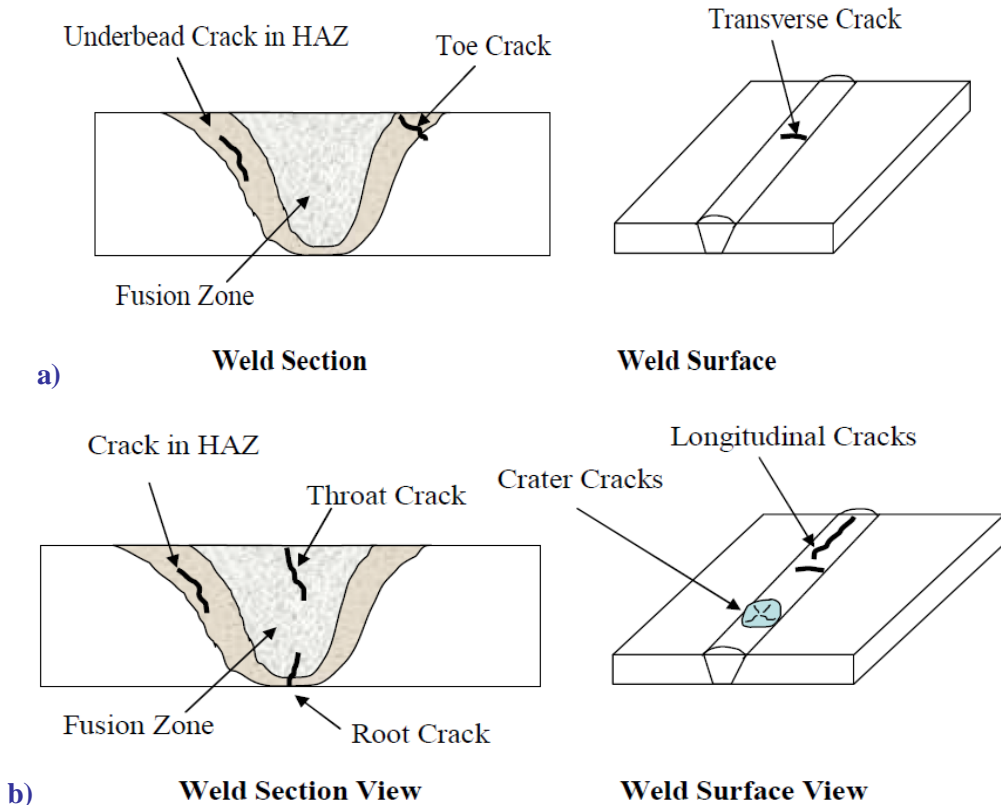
Showing locations of typical (a) cold cracks (b) hot cracks in welds
